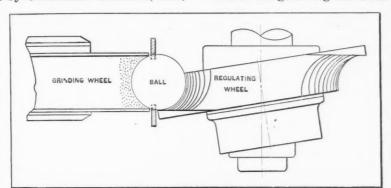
How the Grinding and Regulating Wheels are Dressed and Set for Spherical Grinding
